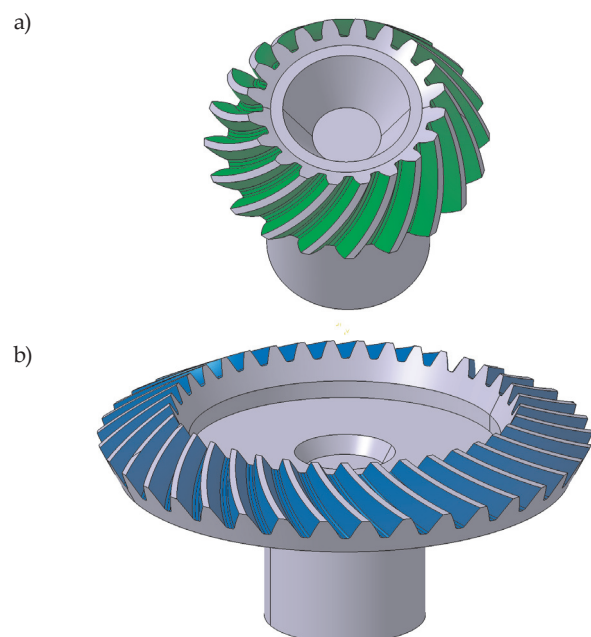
The 3D-CAD nominal models: a) pinion, b) gear
